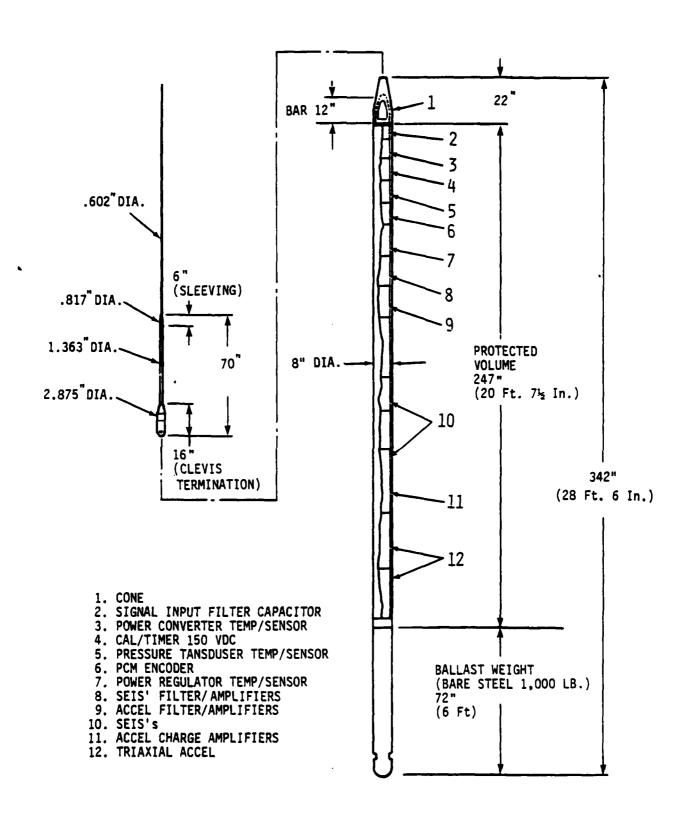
AT-SEA-TEST BIP MECHANICAL OUTLINE
